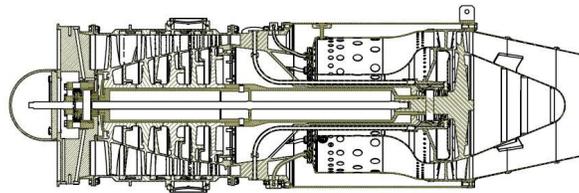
Turbojet engine cross-section (Courtesy TGM Turbines).
